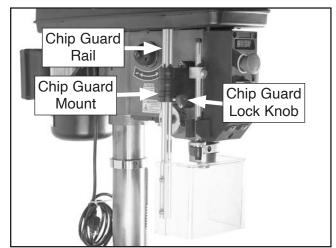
Chip guard rail inserted through mount (T33960 shown).
